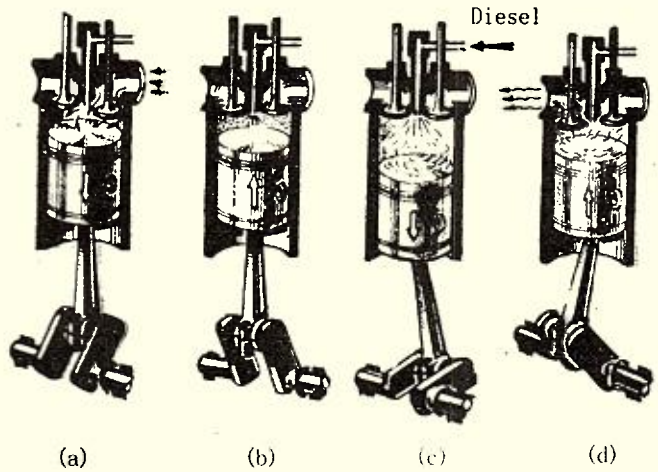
Working principle of single - cylinder four - stroke diesel engine
